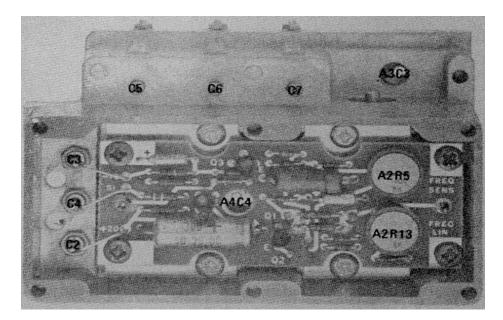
Third Converter Assembly A2, Bottom View (P/O Change A)
